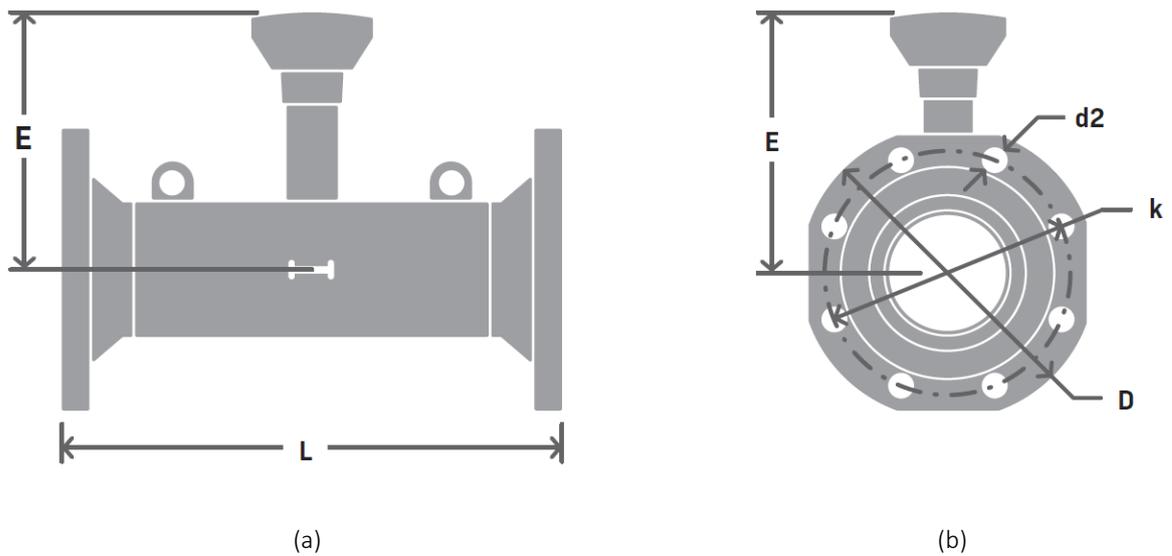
Dimension sketch of ULTRAFLOW® 85 DN150-300: (a) side view and (b) axial view.
